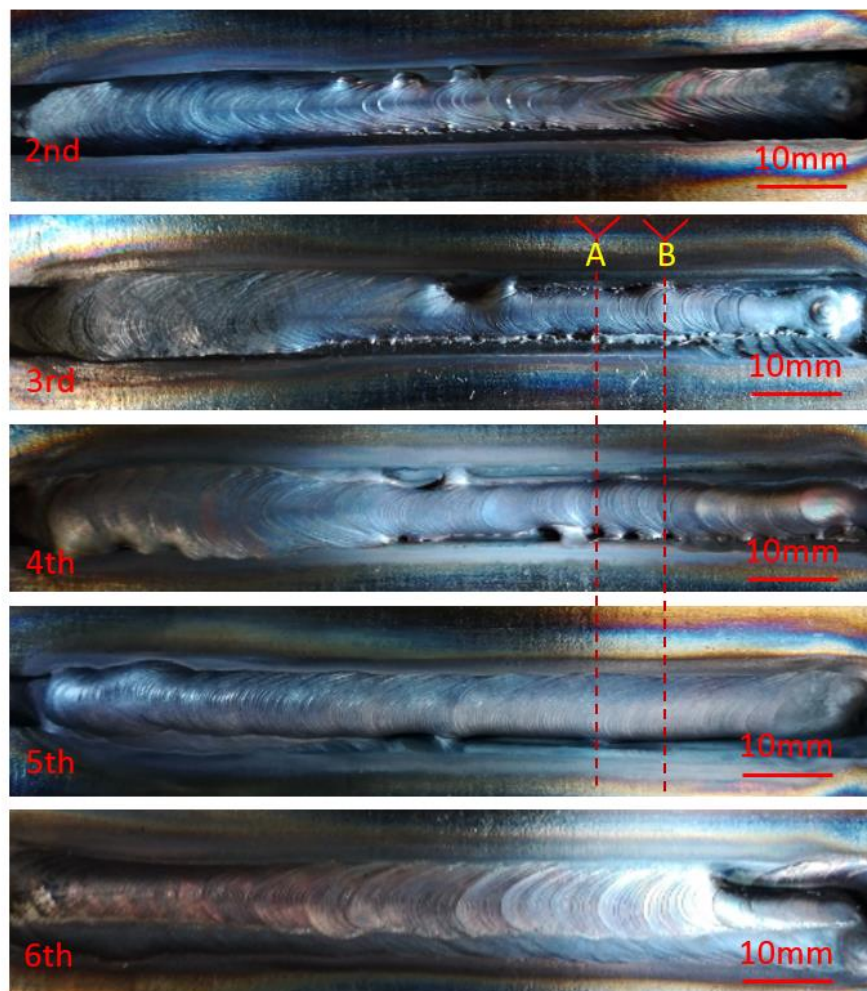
Topside view of the multi pass weld on workpiece I
